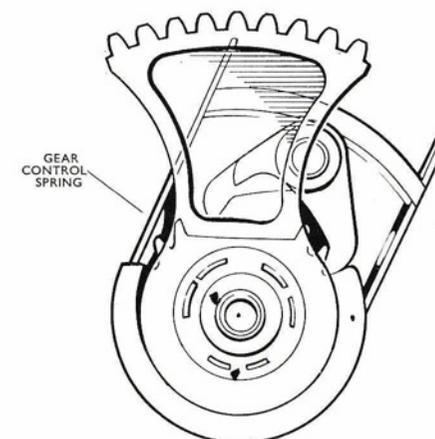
Showing positioning of pawls and gear control spring relative to the quadrant.
